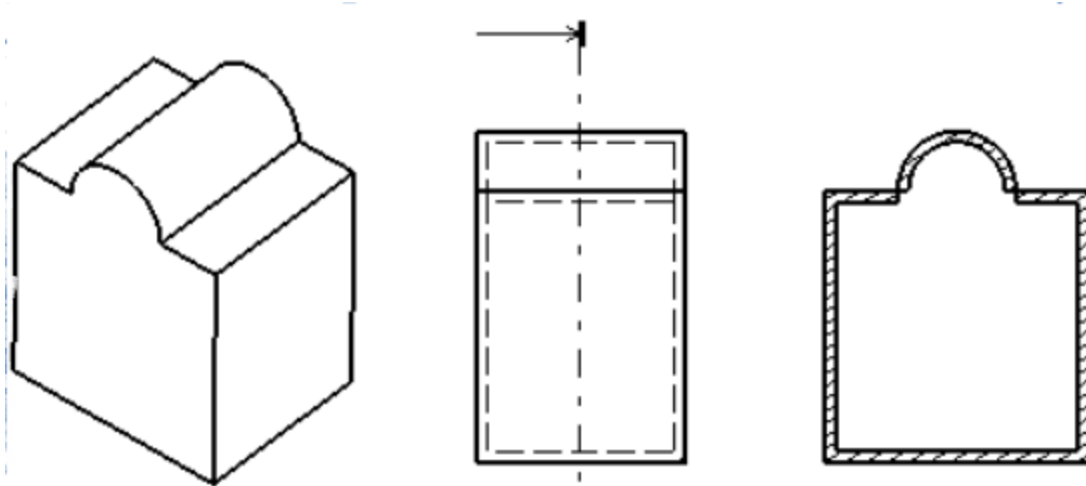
3D hollow solid part views (Isometric view, View from side, Section Cut view)
